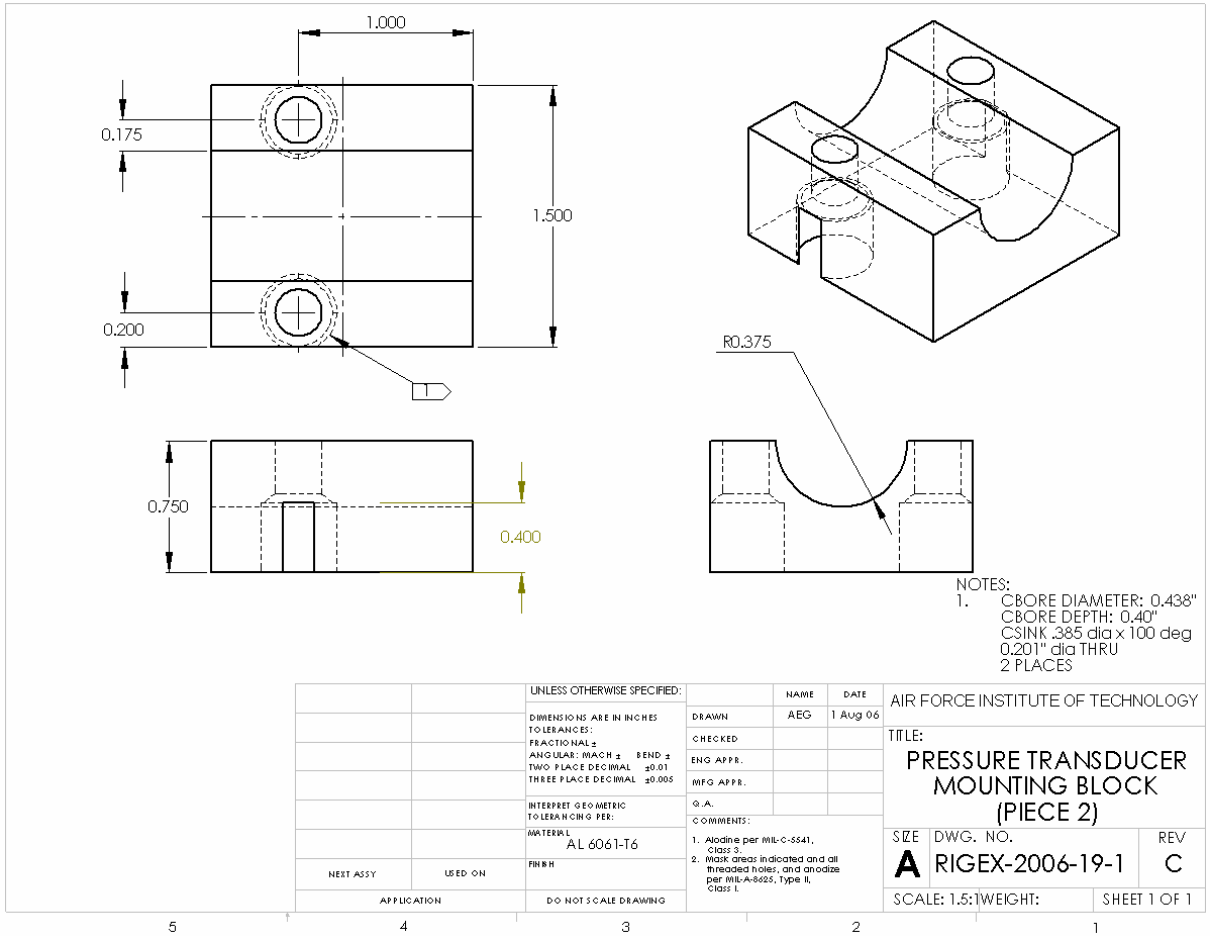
Experiment Pressure Transducer Mounting Block Piece 2
